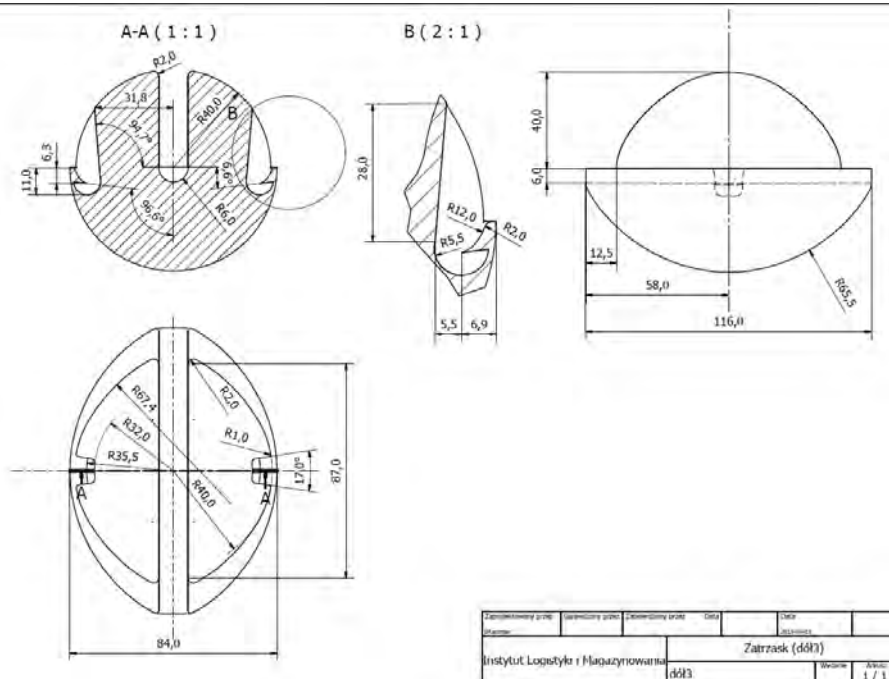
Float 1 two-pieces - "latch" - the technical drawing.
